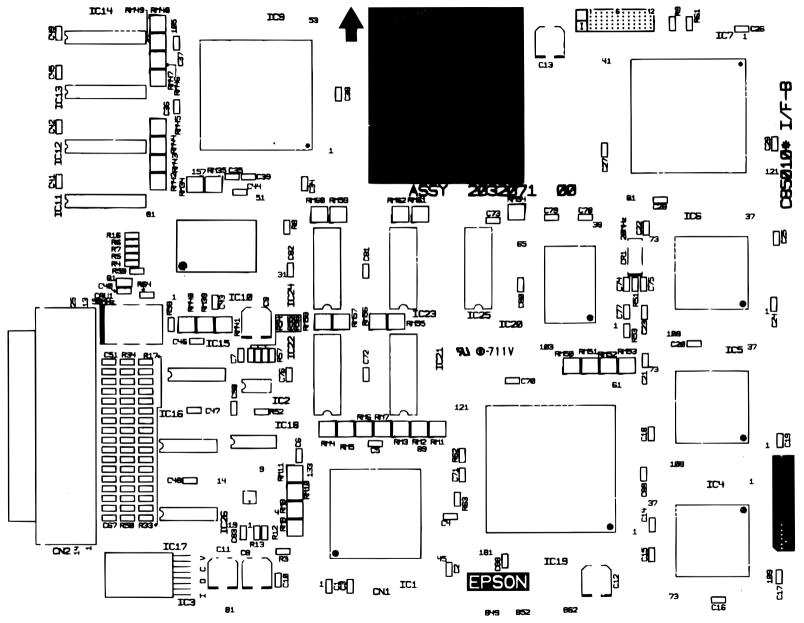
C85010 I/F-B (ECP Board) Component Layout
